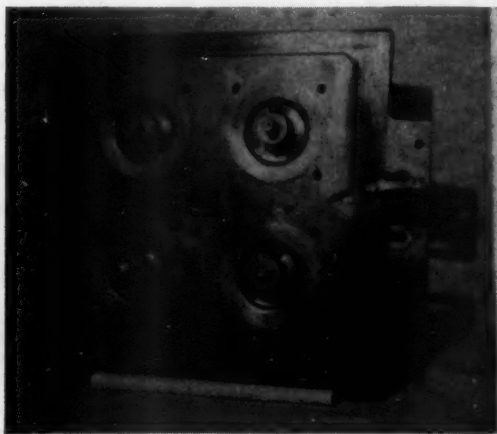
OLD STYLE MATCH PLATE PATTERNS CAST IN SEPARATE HALVES AND BOLTED TOGETHER ON PLATE.
